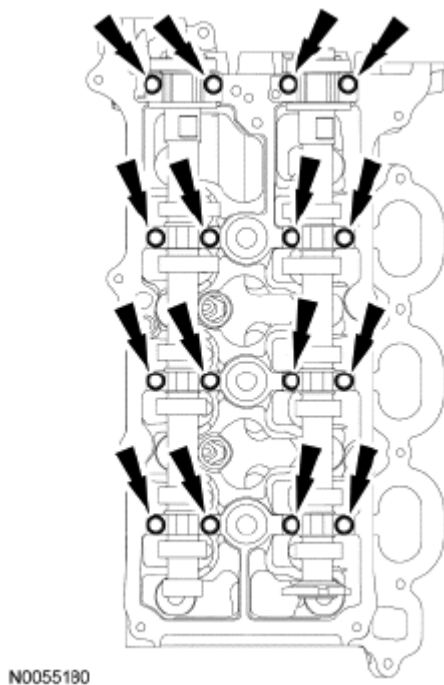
Locating LH Camshaft Bearing Caps Bolts
